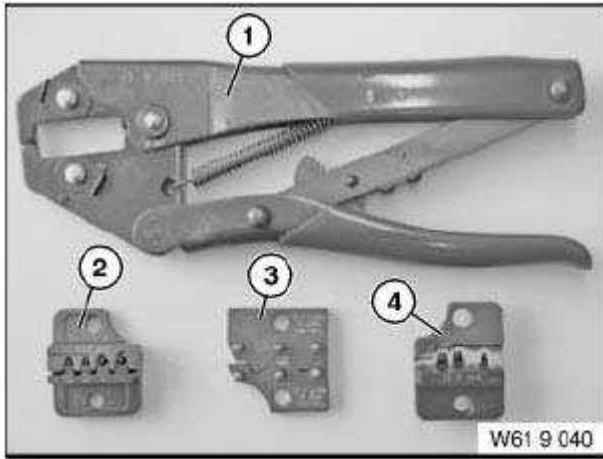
Set Of Tools For Repair Kit IV (61 9 040)
